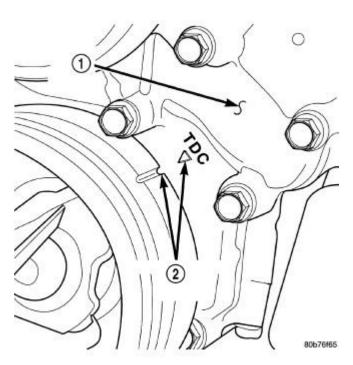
Engine Top Dead Center Courtesy of CHRYSLER LLC
